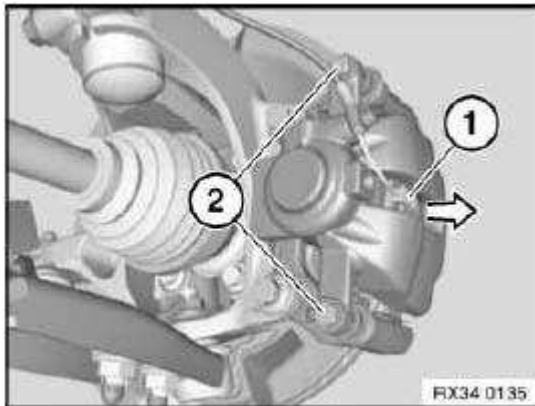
Identifying Brake Lining Wear Sensor And Guide Bolts
